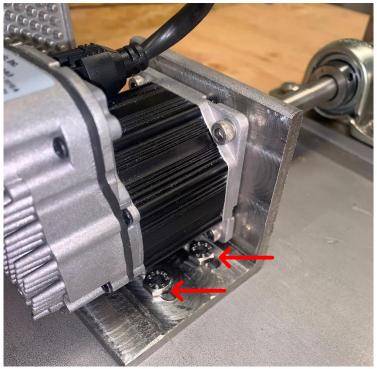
Four mounting bolts (two on other side) used to mount motor mount onto base plate
